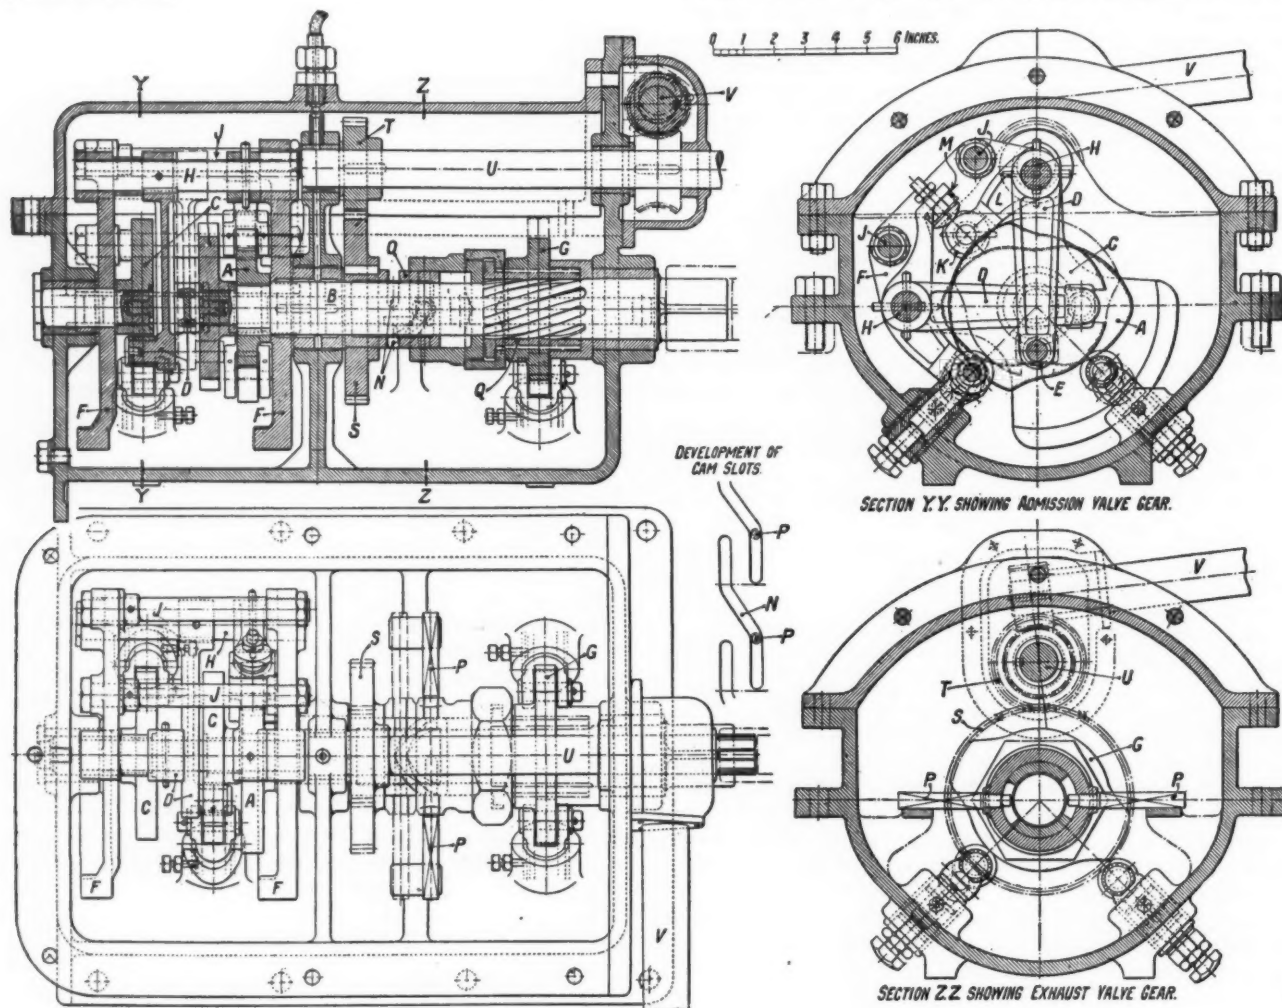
GENERAL ARRANGEMENT OF CAMSHAFT DRIVE FOR THE HOLMES POPPET-VALVE GEAR
